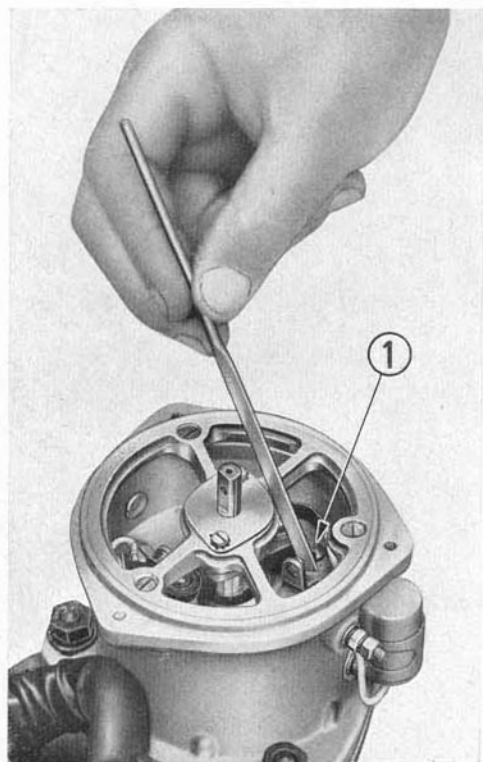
Ignition distributor : 1) screw for setting the contacts.
